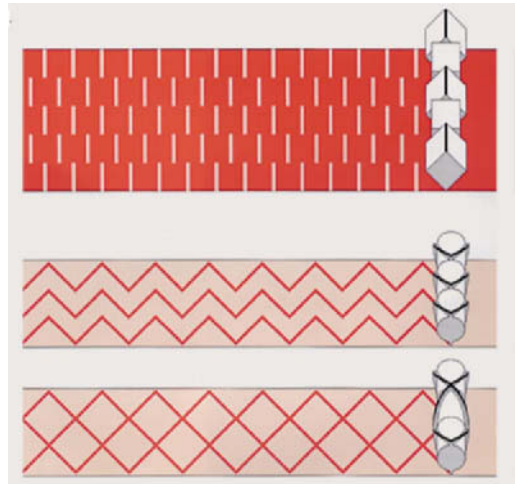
Pattern cutting assembly with drive for geometric and floral designs.
